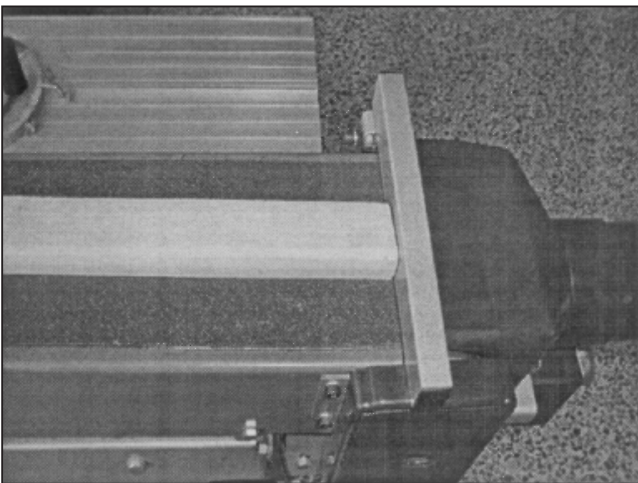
The iron block should be put down when the machine is in use of flat sanding.
